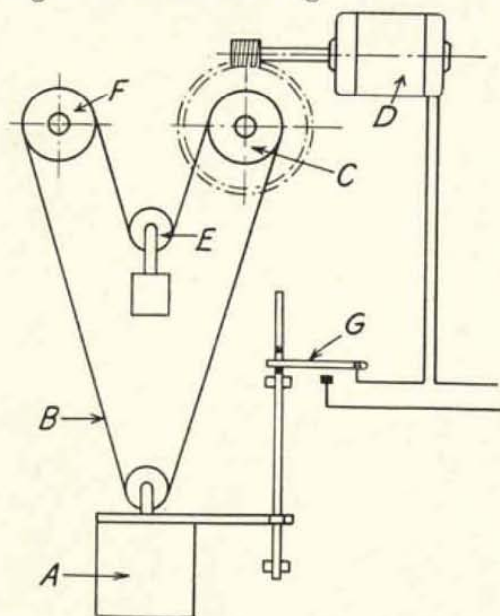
SIMPLE ELECTRIC WINDING GEAR FOR TURRET CLOCK
